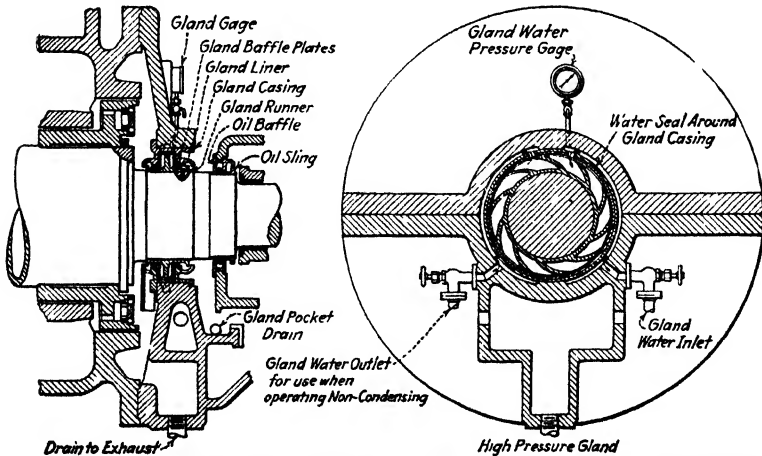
Water-sealed spindle gland for high-pressure end of Allis-Chalmers turbine.
